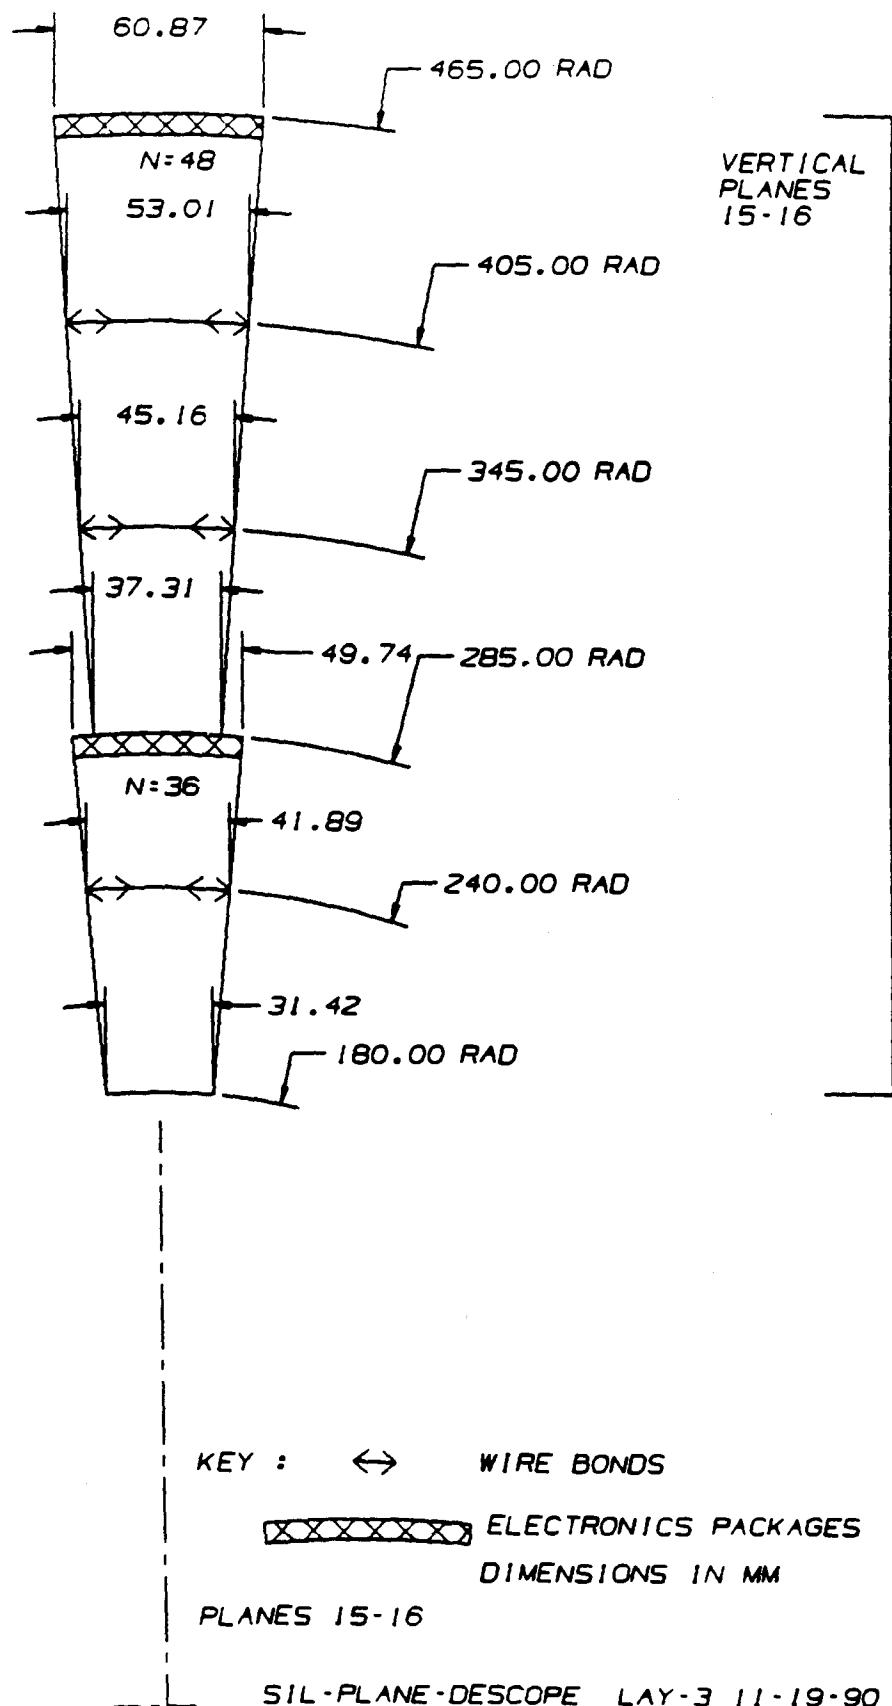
Detail of Detectors on Planes 15 and 16
